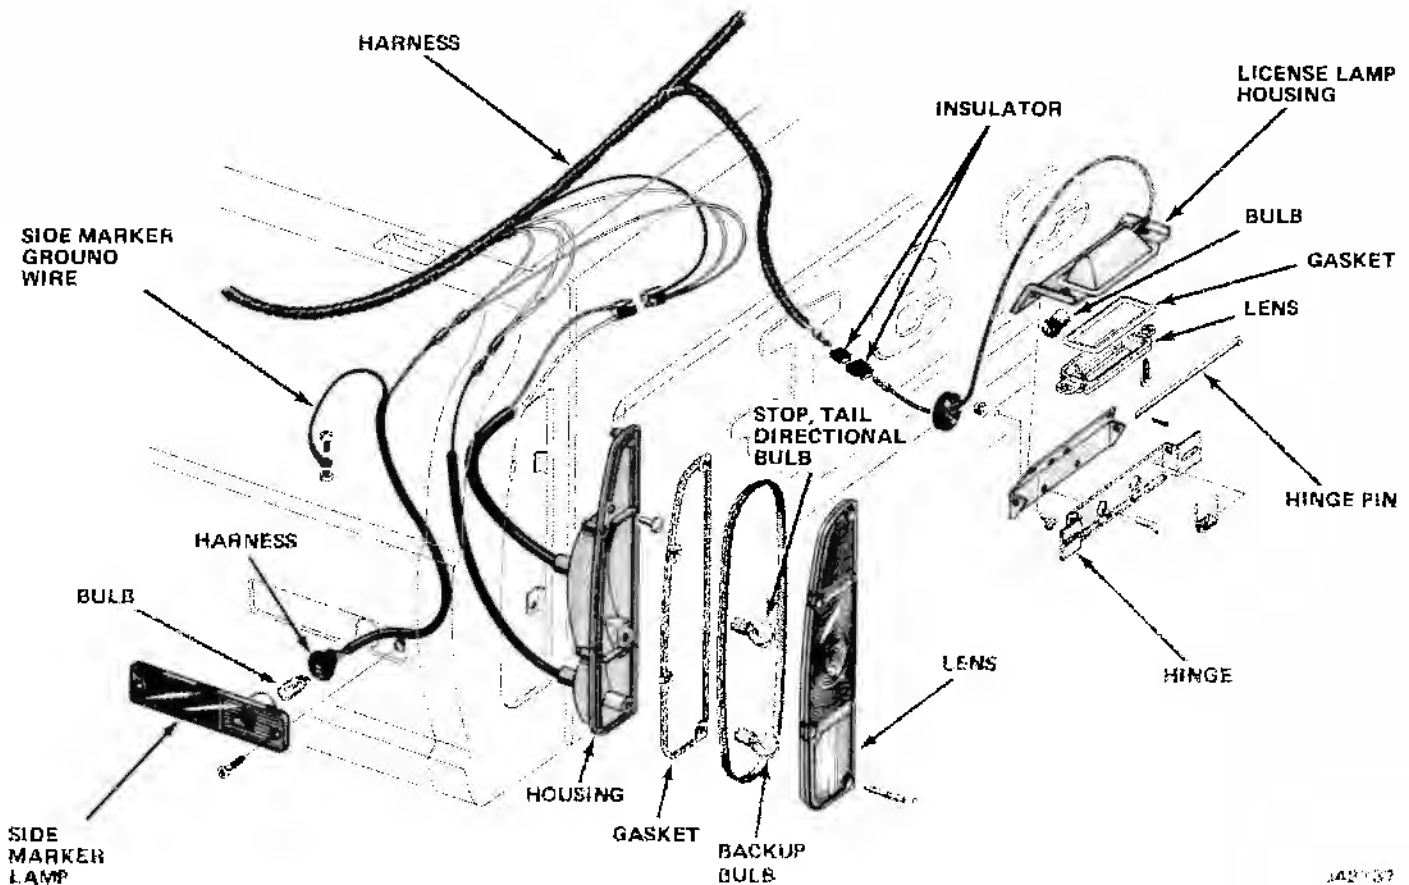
Rear Directional, Stop, Backup, Taillight and Side Marker - Truck
